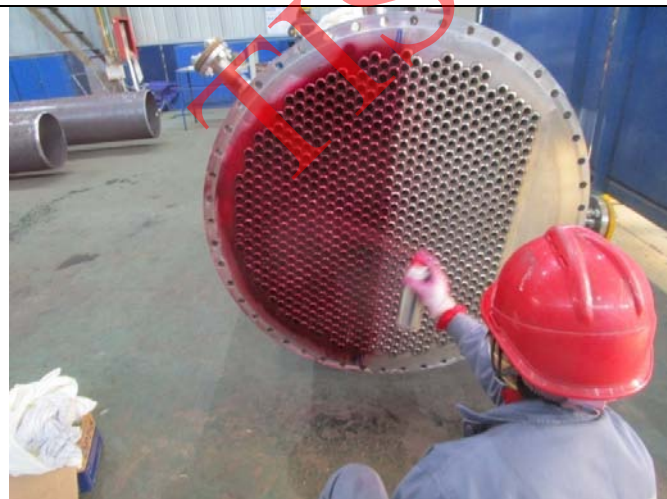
PT check for weld of bottom tube-to-tube sheets
